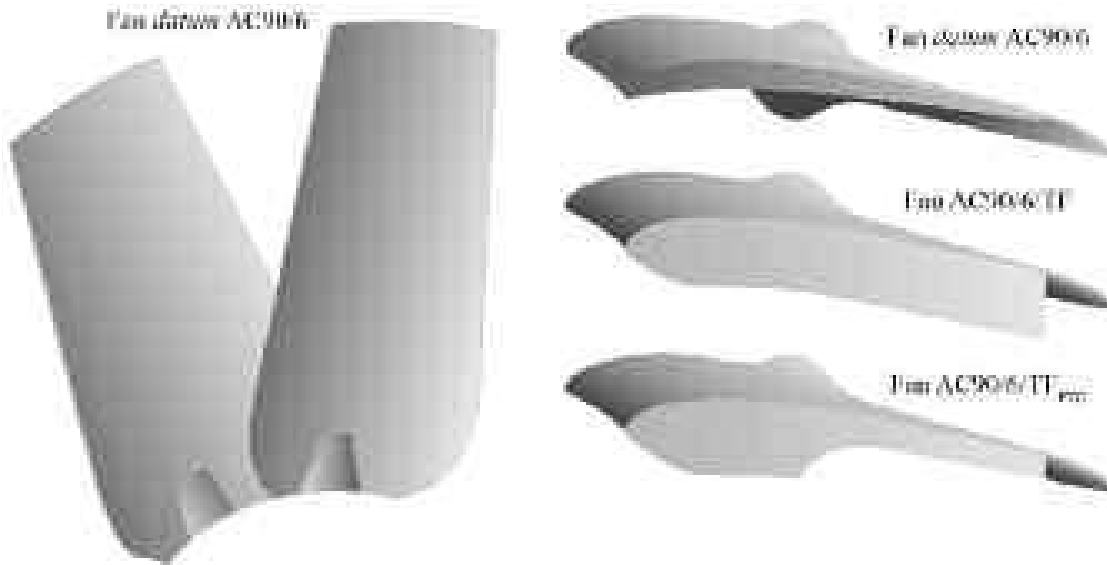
The studied fan *datum* AC90/6 without a fitted blade-tip end-plate, with a constant thickness blade-tip end-plate, AC90/6/TF and with a variable thickness blade-tip end-plate, AC/6/TF_{VTE}.
